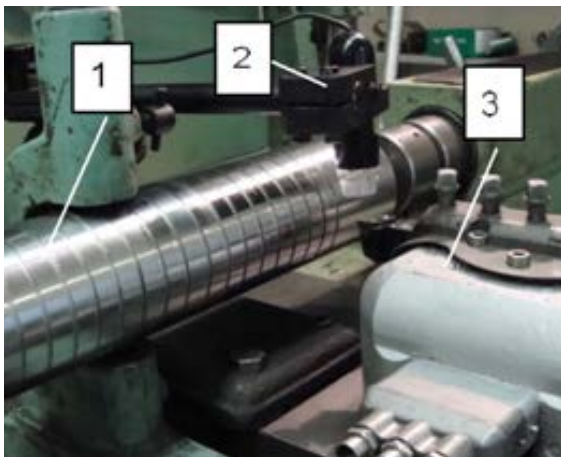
Experimental scheme: 1- machined part; 2 – digital microscope; 3 – UDM – 600 dynamometer
